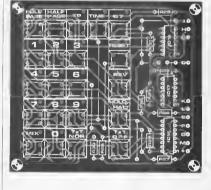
The printed circuit board and component overlay of the keyboard section. Since only the shaded part of figure 2 is placed on this board, it contains just three ICs besides the keys.
